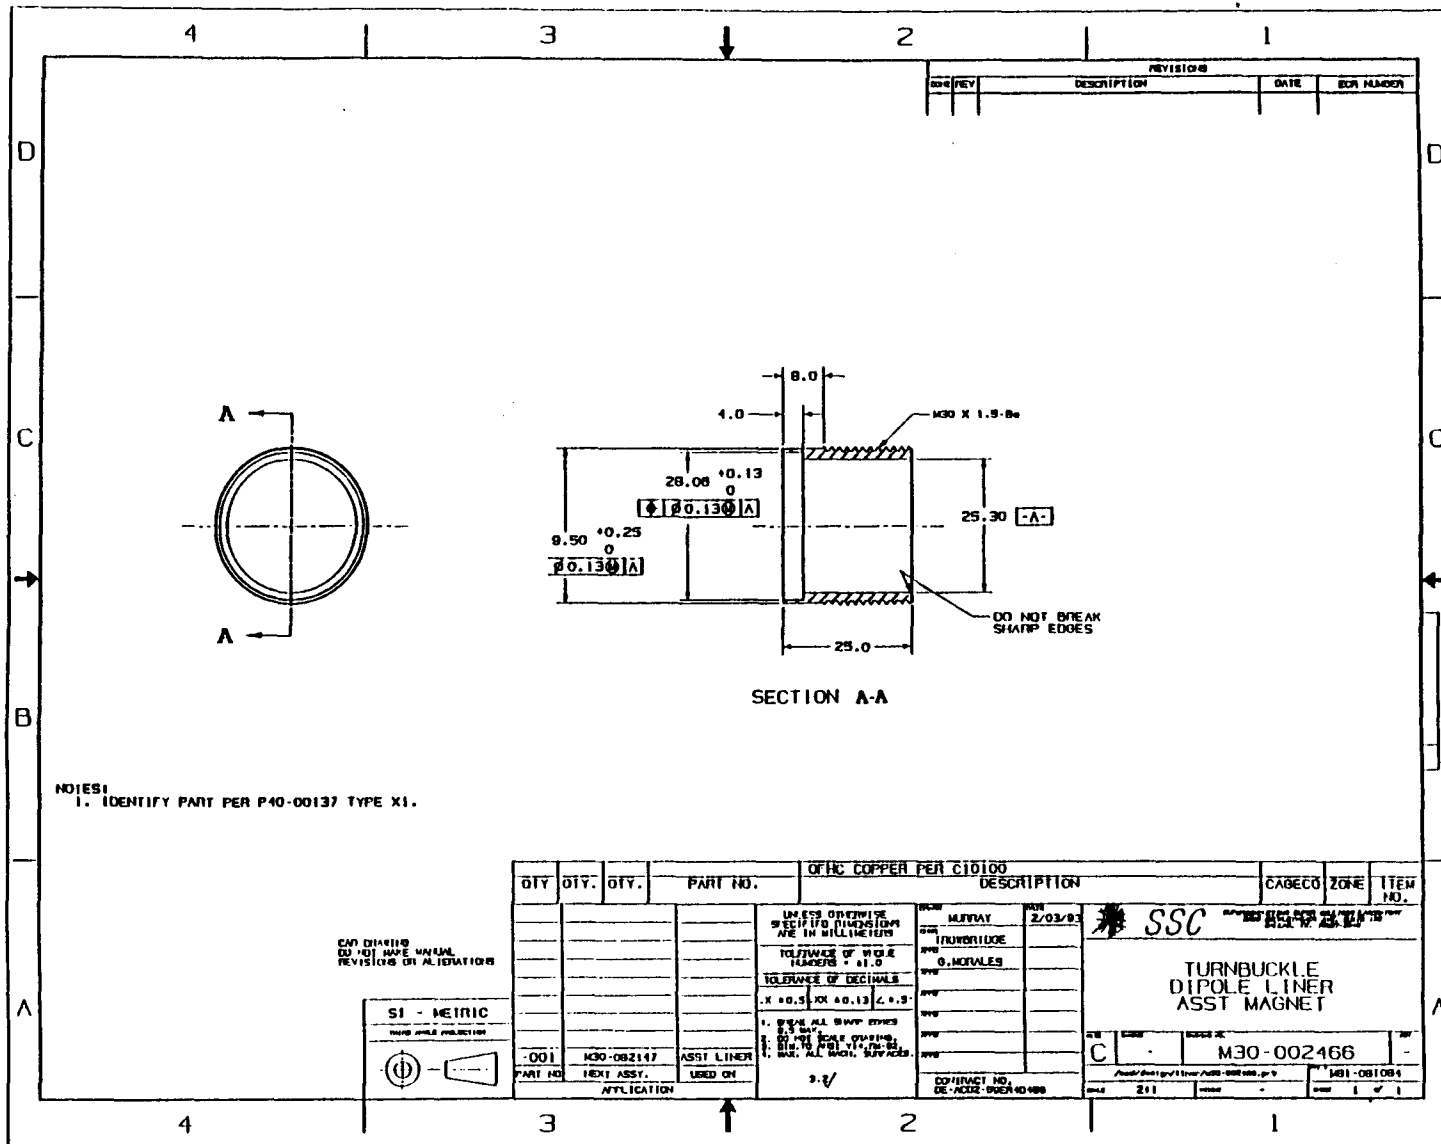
Sleeve of Majlic Joint which Brazes to Dipole Liner.
